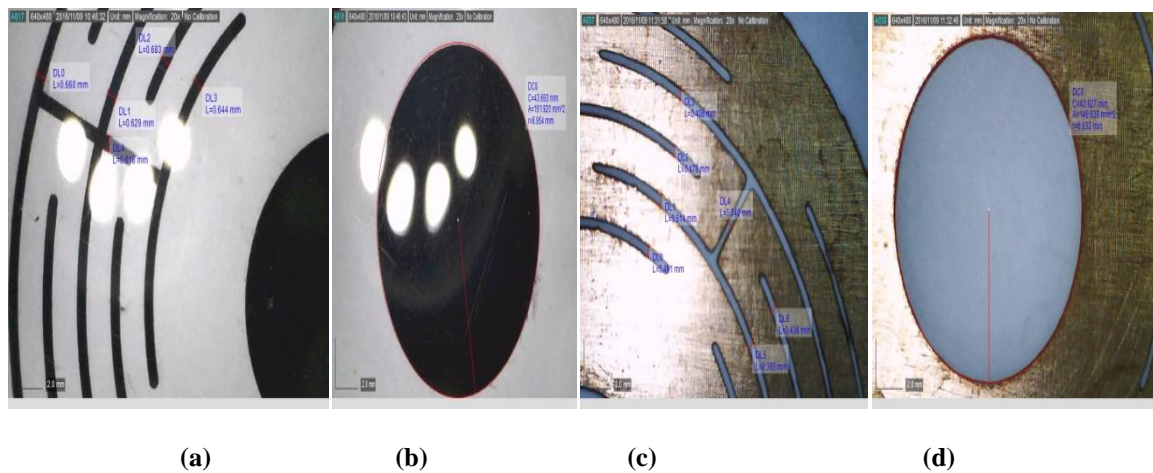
Flexure Bearing, (a) & (b) Photo tool and its measurement, (c) Etched specimen slot measurement, (d) Etched central hole measurement
